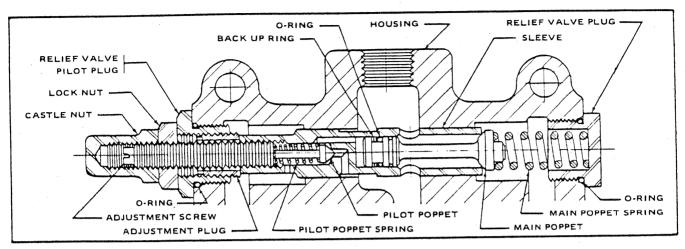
Relief Valve - Pilot Operated (External Adjustment)
